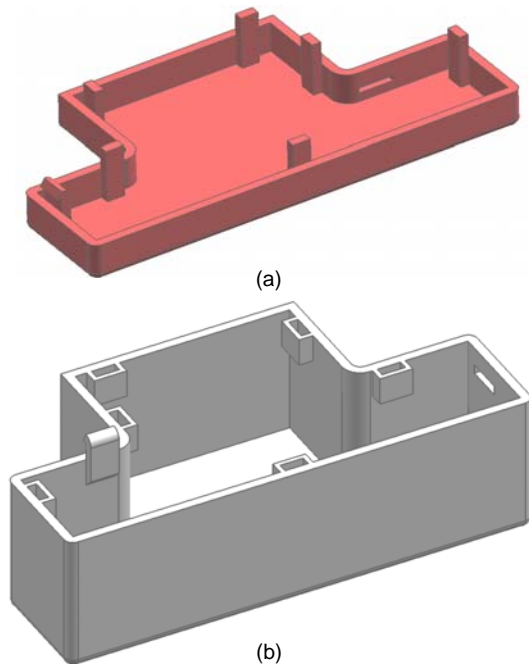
CAD drawing for the optimized DVD player model (solution 7) (a) top part, (b) base part.
